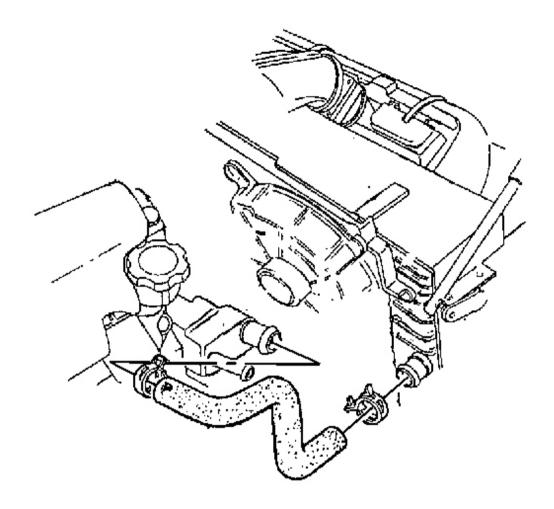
Radiator Outlet Hose & Radiator Outlet Courtesy of GENERAL MOTORS CORP.
